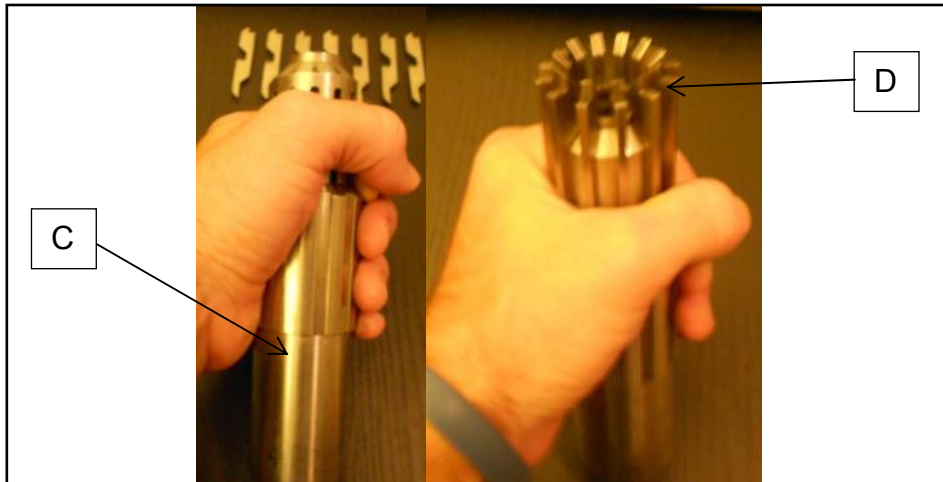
Probe assembly step 2 showing Part C and Part D
